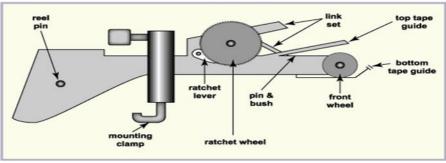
Drag feeder and different parts of a drag feeder
